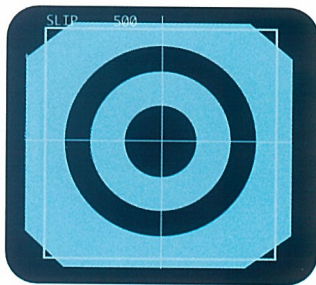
IMAGE PROCESSING SYSTEM X-RAY DRILLING MACHINE FOR MULTI-LAYER BOARD
